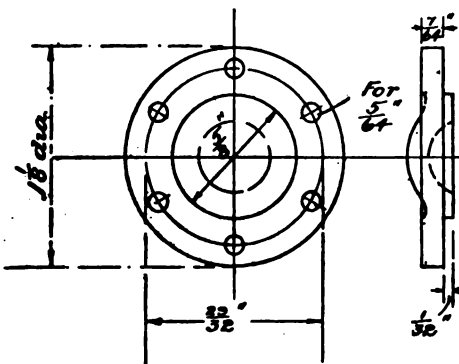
HIGH-PRESSURE FRONT CYLINDER COVER.
